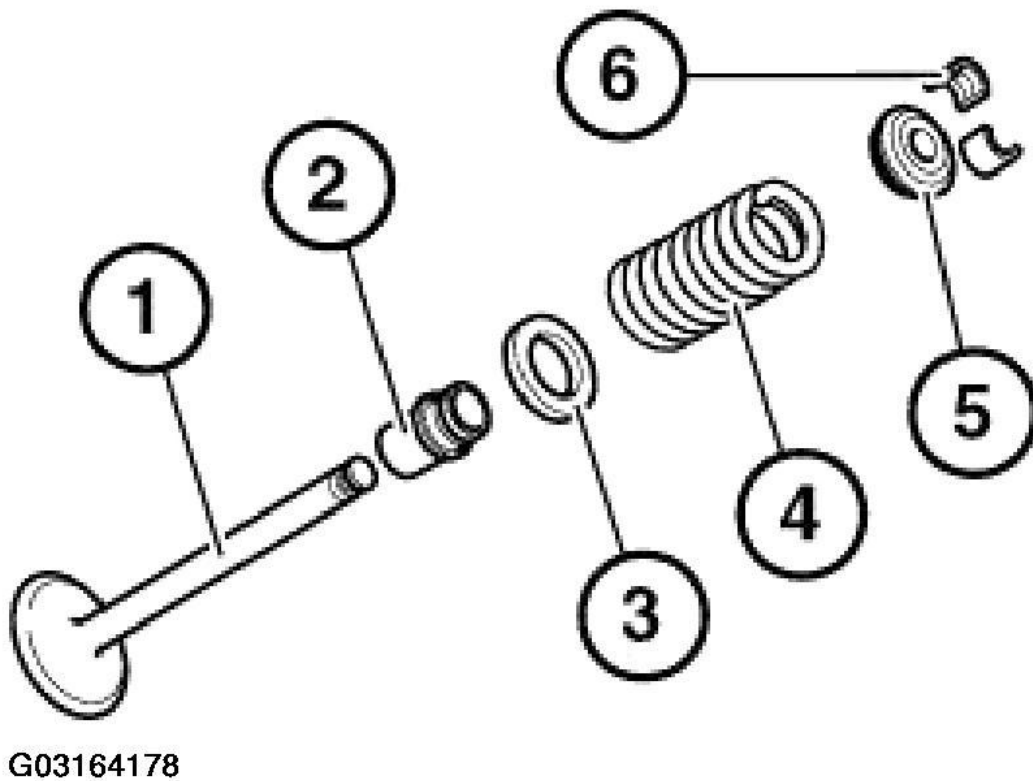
Identifying Valve, Valve-Stem Seal And Valve Spring
